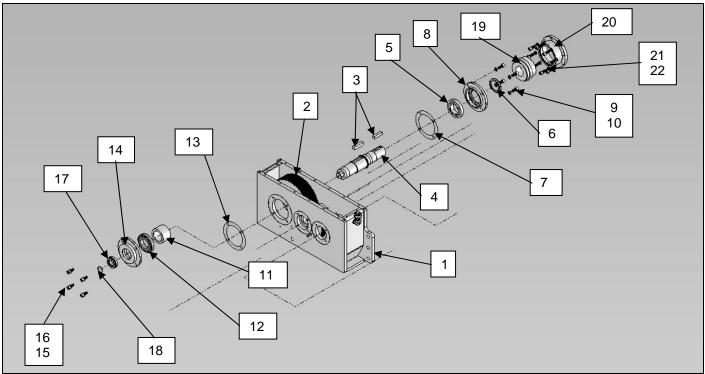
, Gearbox Assembly, (Drum Output Shaft)
